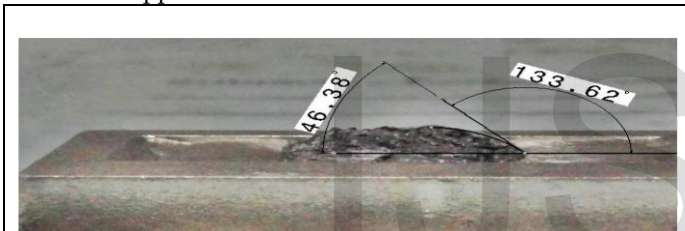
Tin coated sample after vacuum soldering for contact angle measurement
